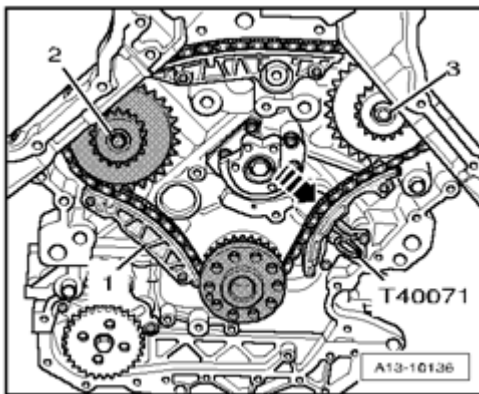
Pushing Drive Chain Tensioner Guide Rail And Securing Chain Tensioner Using Securing Pin T40071
